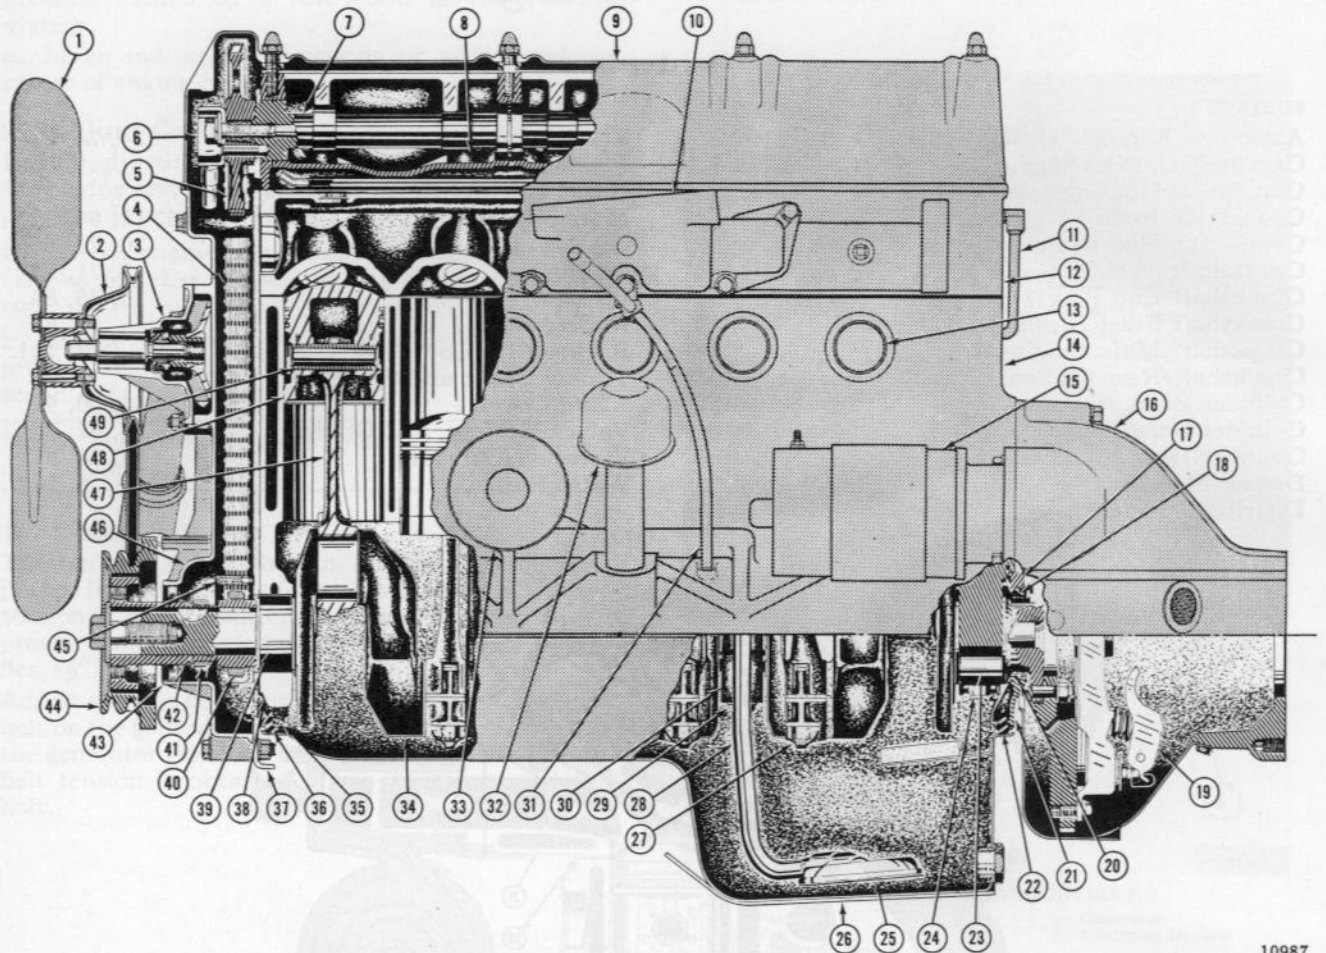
TORNADO 230 ENGINE—SIDE SECTIONAL VIEW
